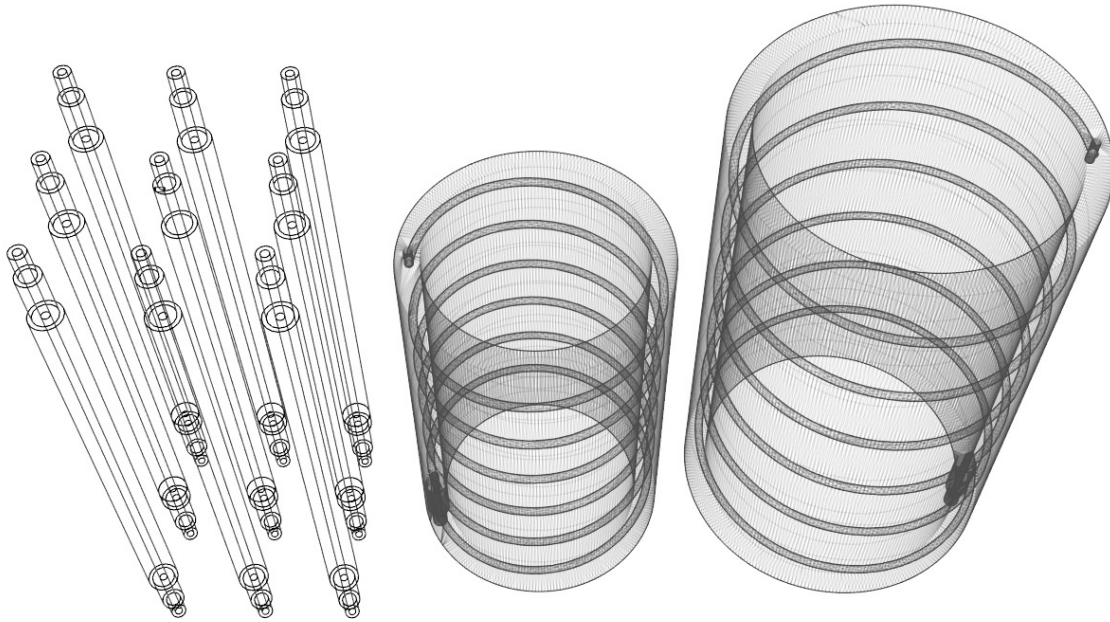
CAD Model of 3D Printed Antenna - Outline View
